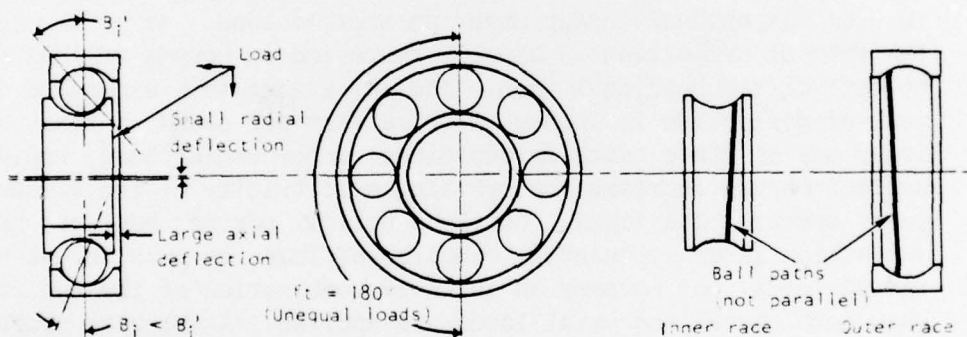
Bearing with Heavy Thrust Load and Light Radial Load
